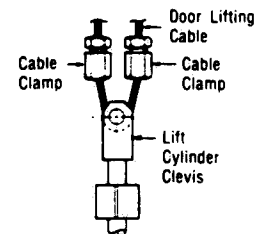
CONNECTING DOOR LIFTING CABLE.
